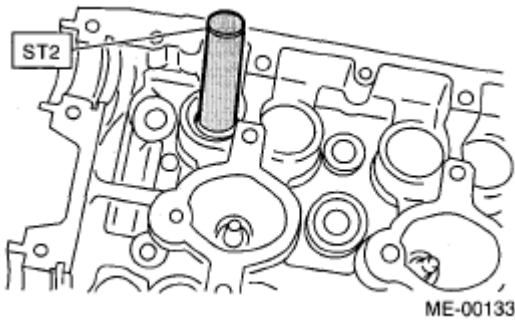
Identifying Valve Oil Seal Guide (ST2 498857100)
